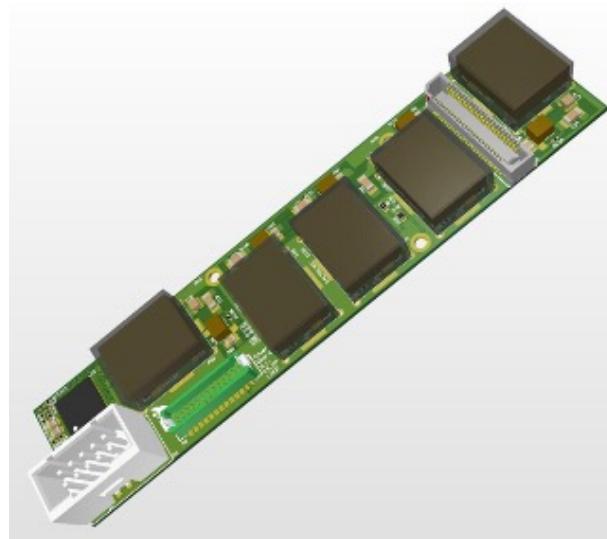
CAD drawing of the Powerboard. The five bPOL12V converters with shields, the MOPS chip and the connectors are mounted.
